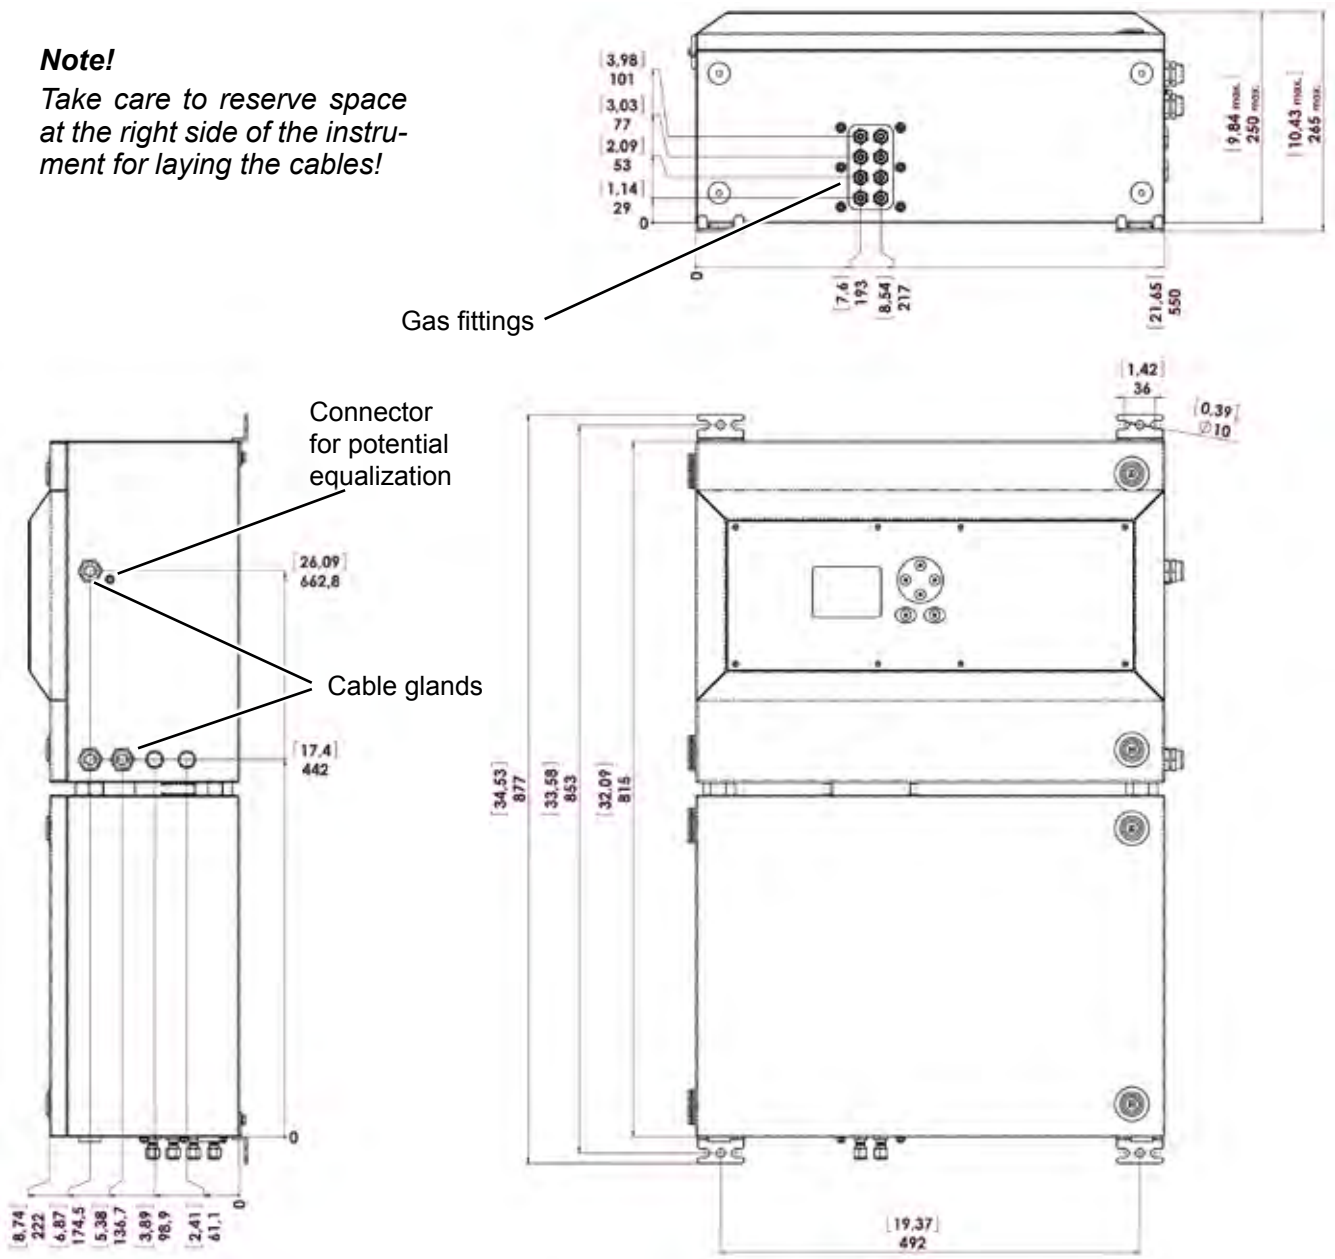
X-STREAM XEF - Dimensions for Installation
